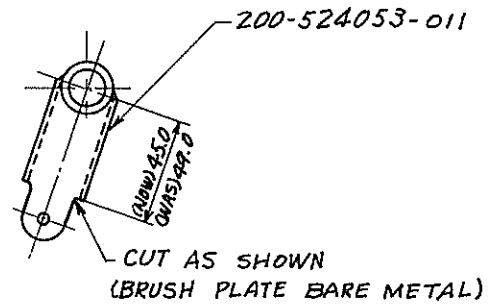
RUDDER FRONT TORQUE TUBE ARM
